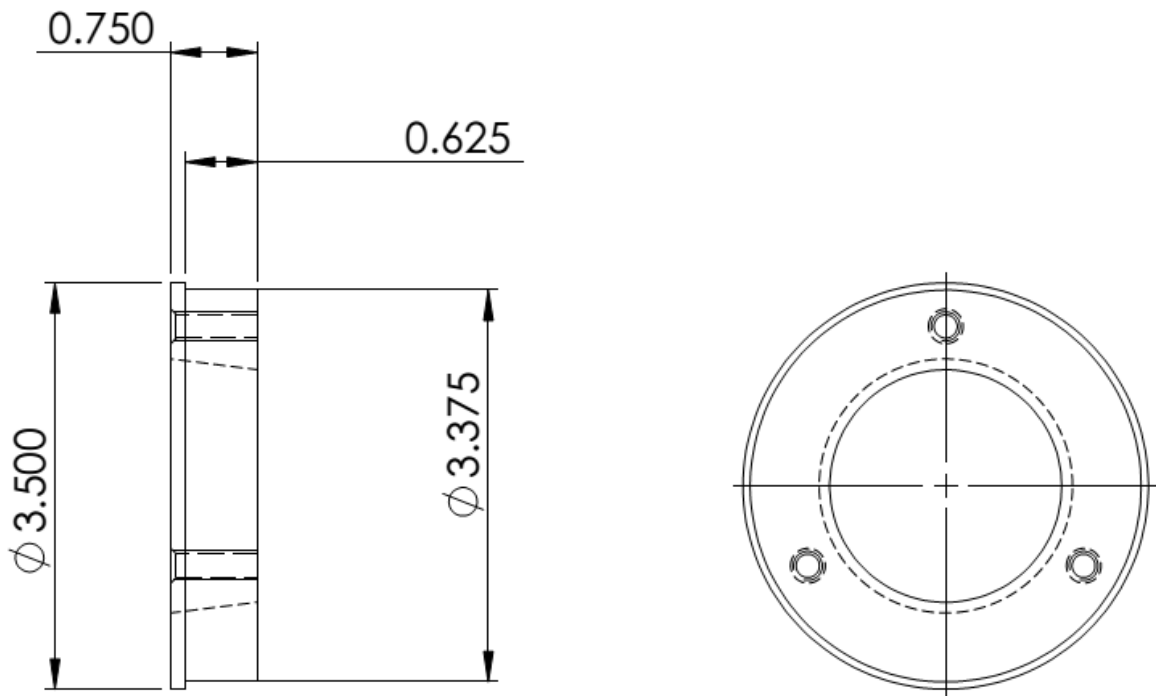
Detailed Dimensions Weld on Hub
